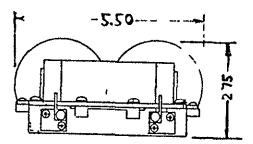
Outline Drawing of 6KW Beam Transformer
